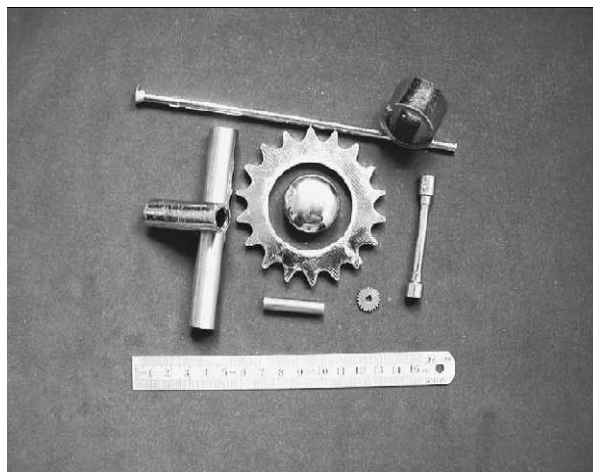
Metallic glasses can be molded into little machinery pieces like screws or gears that may resist high tensions.
